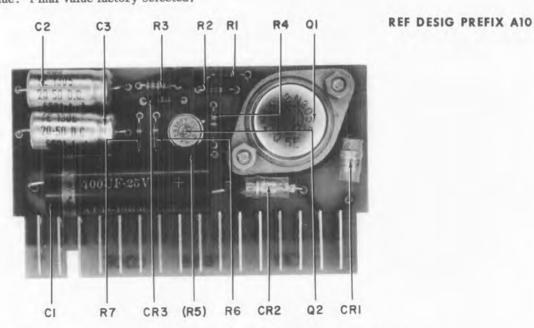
Type 7688 +12V Power Supply Regulator, Component Locations
